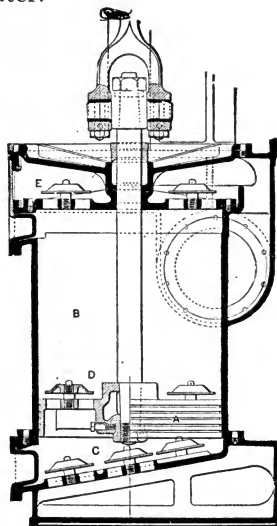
,209.—Direct connected vertical air pump. *The lettered parts* are: A, bucket or piston; B, barrel; C, foot valves; D, bucket valves; E, head valves.
